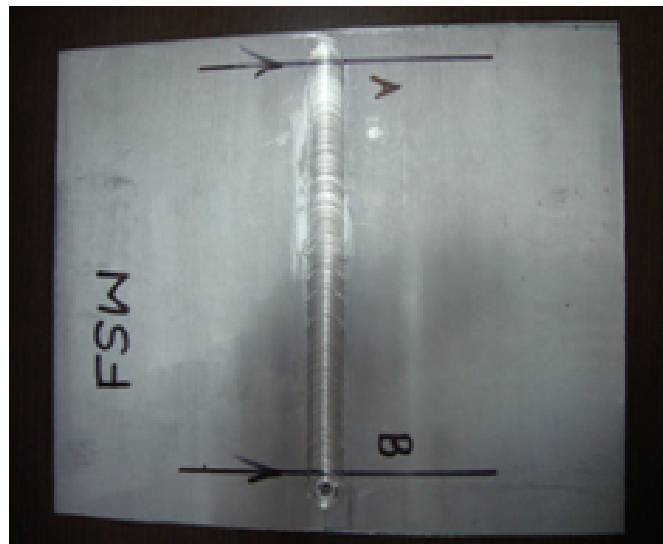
Friction stir welded joint of AA2219 Alloy
